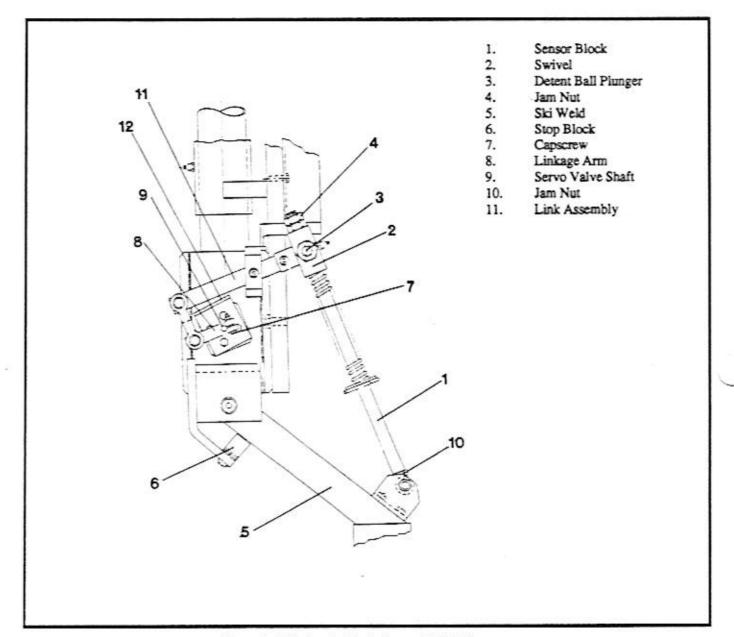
Hydraulic Grade Sensor Null Adjustment
